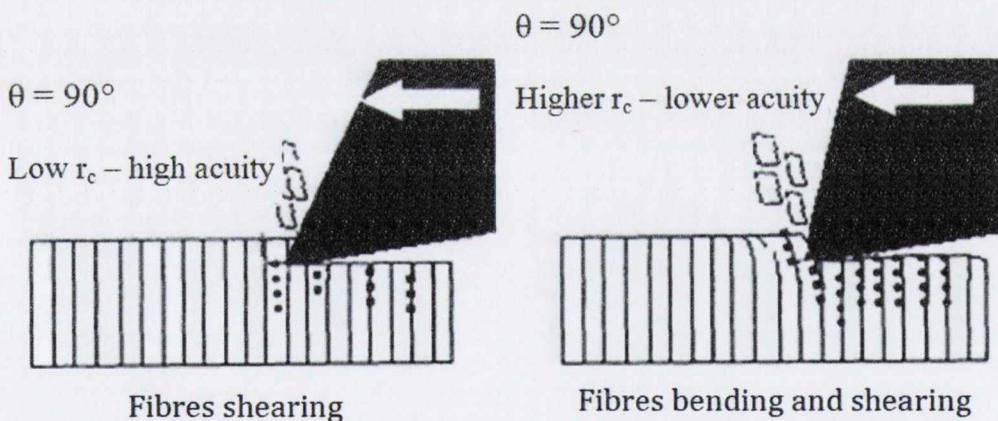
Mechanisms of chip formation during the machining of 90° UDFRP with high or low cutting edge acuity tools. (Adapted from [37])
